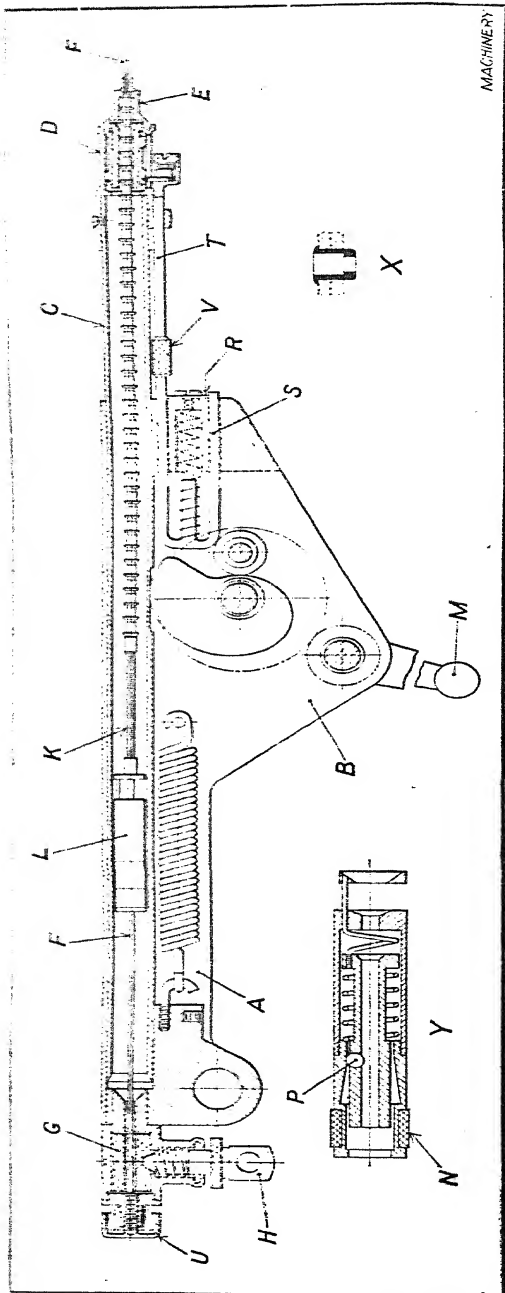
PART-SECTIONED VIEW OF THE CHOBERT GUN
